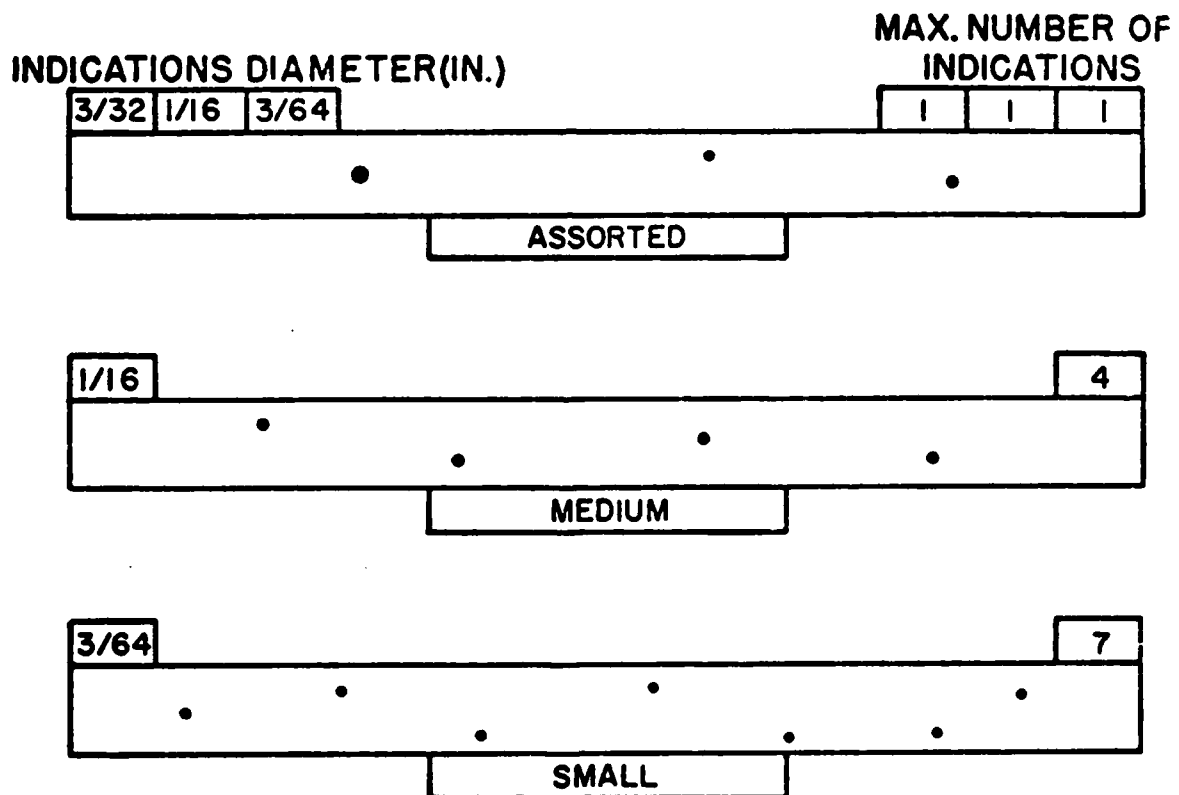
Class 1 Weld Surface Inspection Standard for Scattered Rounded or Non-Linear Indications (Sheet 3 of 6).
